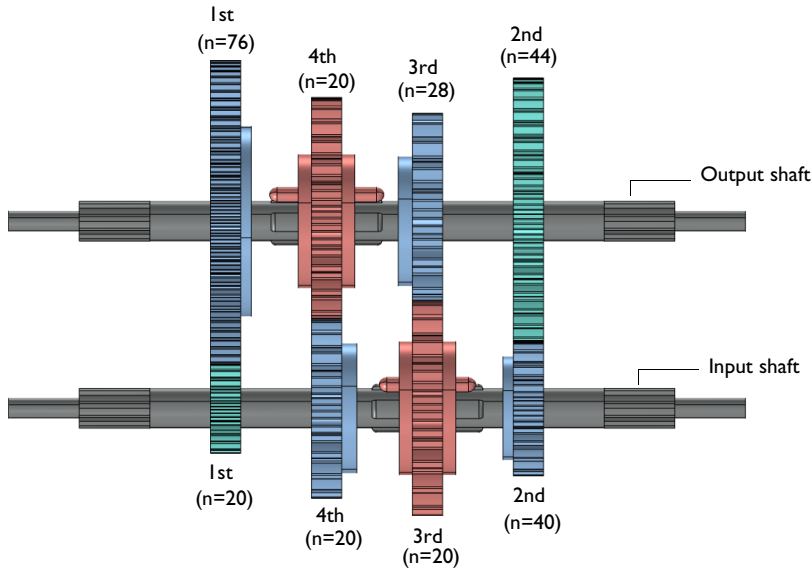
Gear arrangement in the 4-speed sequential gearbox.
